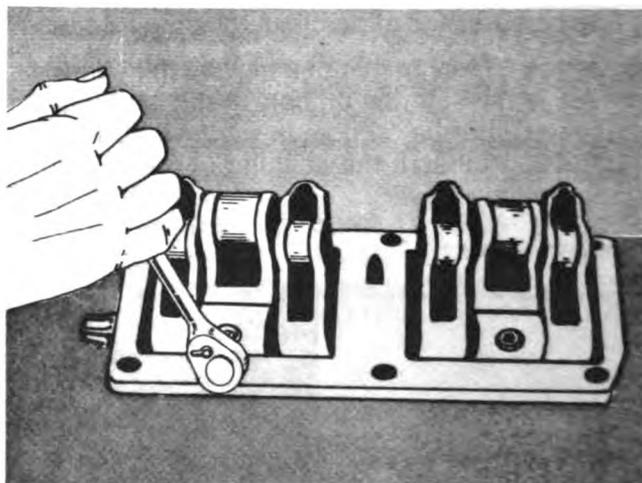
Tighten The Setscrew For The Eccentric.
